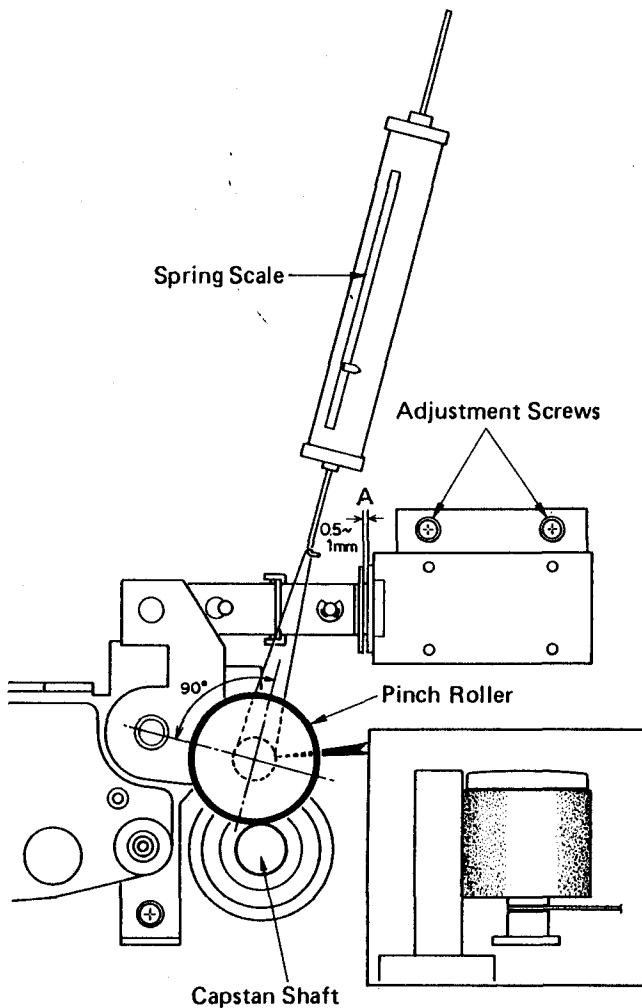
PINCH ROLLER PRESSURE ADJUSTMENT
